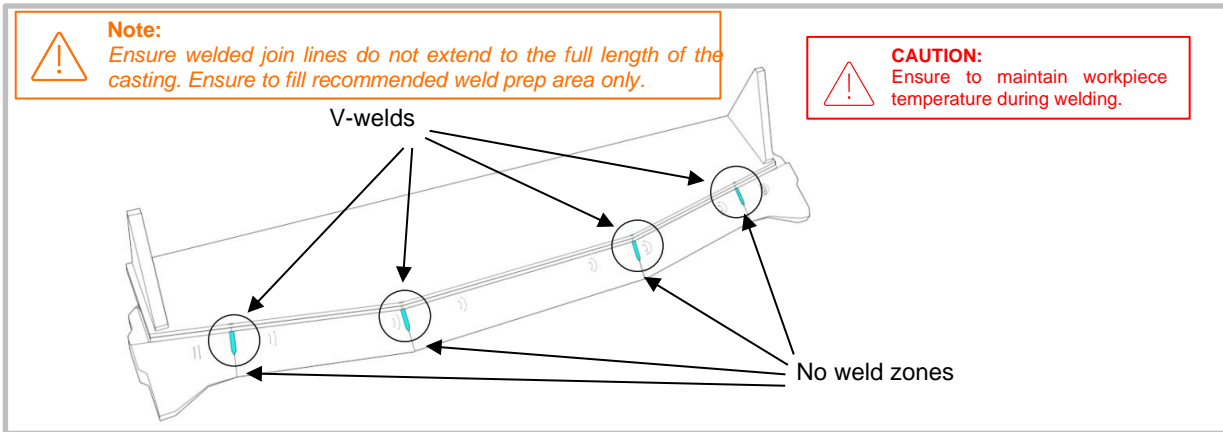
Weld locations example (image is for reference purposes only)
